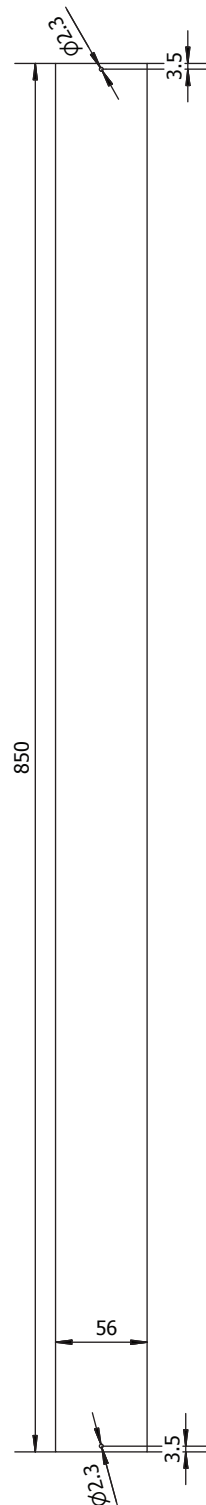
Dimensions of the rf transmission line plates. The plates are cut from 2 mm thick aluminium.
